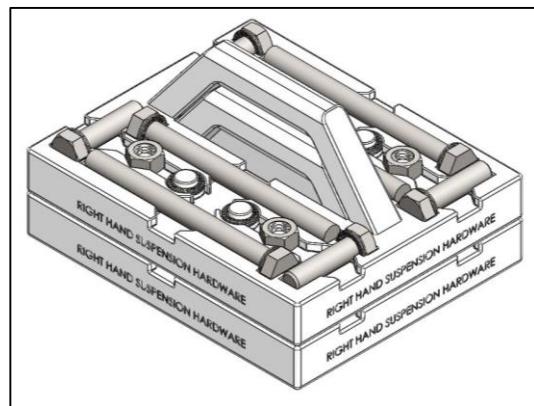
Fully assembled and stacked right-hand suspension fixture [61].
